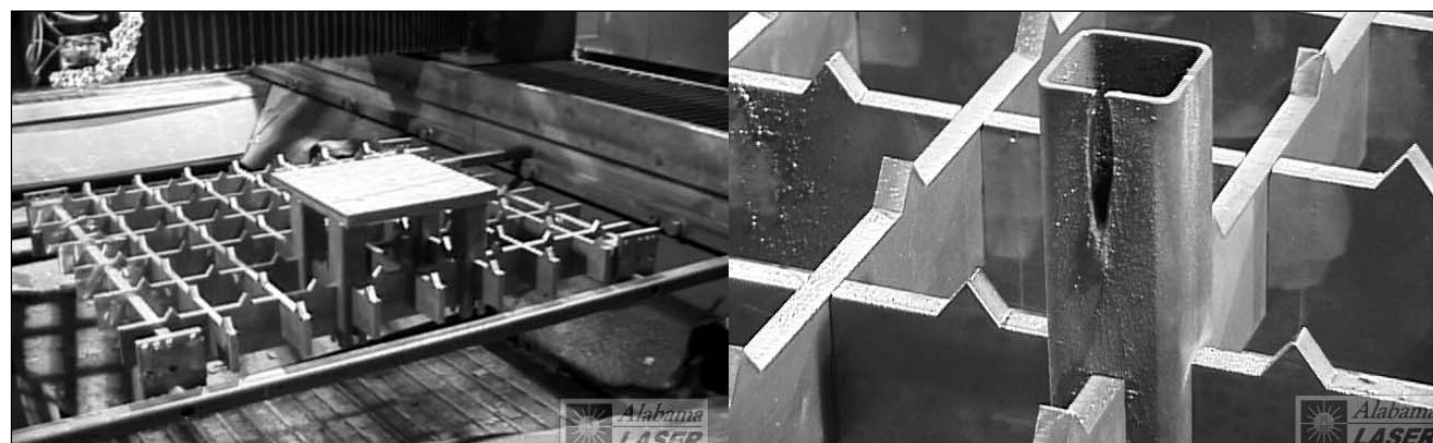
Box section table supports for LASOX cutting. (left) Pins supporting a part ready for LASOX cutting and (right) damage to a pin placed in the path of the LASOX cut.
